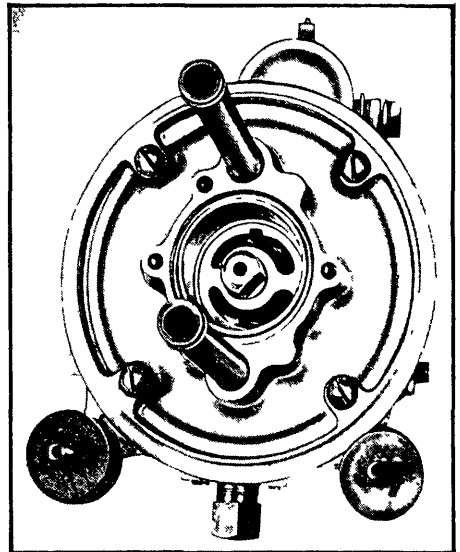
Dura pump. Sh wing rotor cavity with all parts removed
